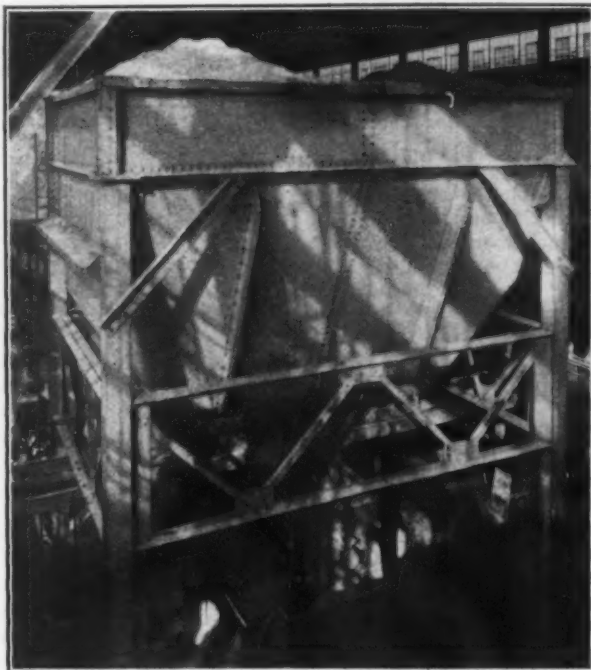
Sand Mixing Machine Surmounted by Hopper with Measuring Gates
